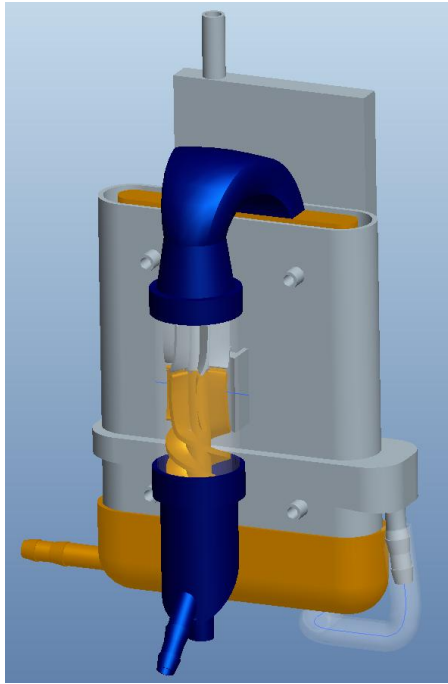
ProEngineer drawing showing the assembled and integrated components of the miniaturized and integrated device in an isometric view.
